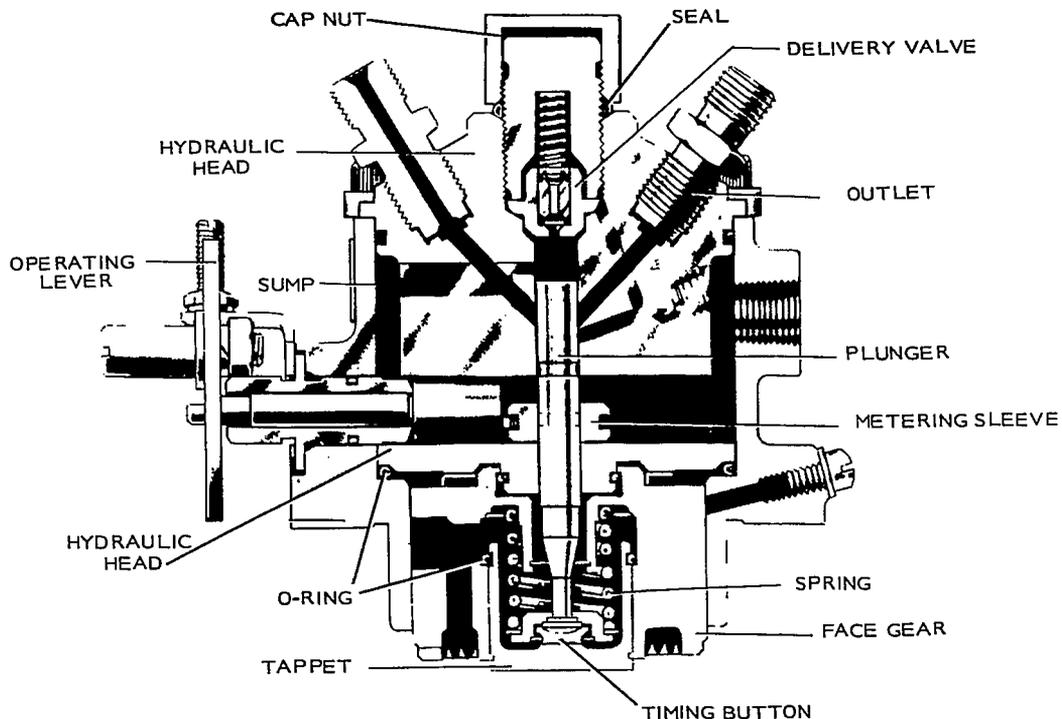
PSU PUMP (CUTAWAY VIEW)
